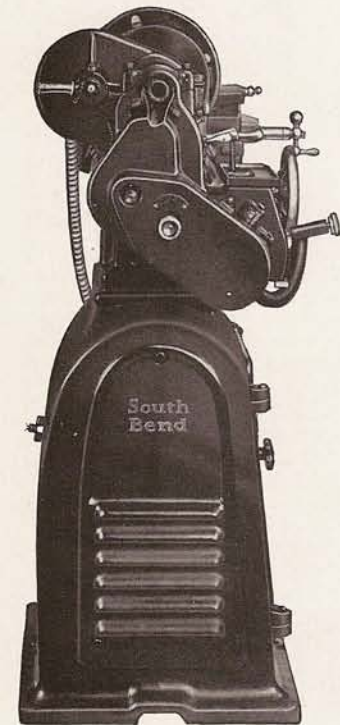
End view of Underneath Belt Motor Driven Lathe, showing removable ventilated end plate
